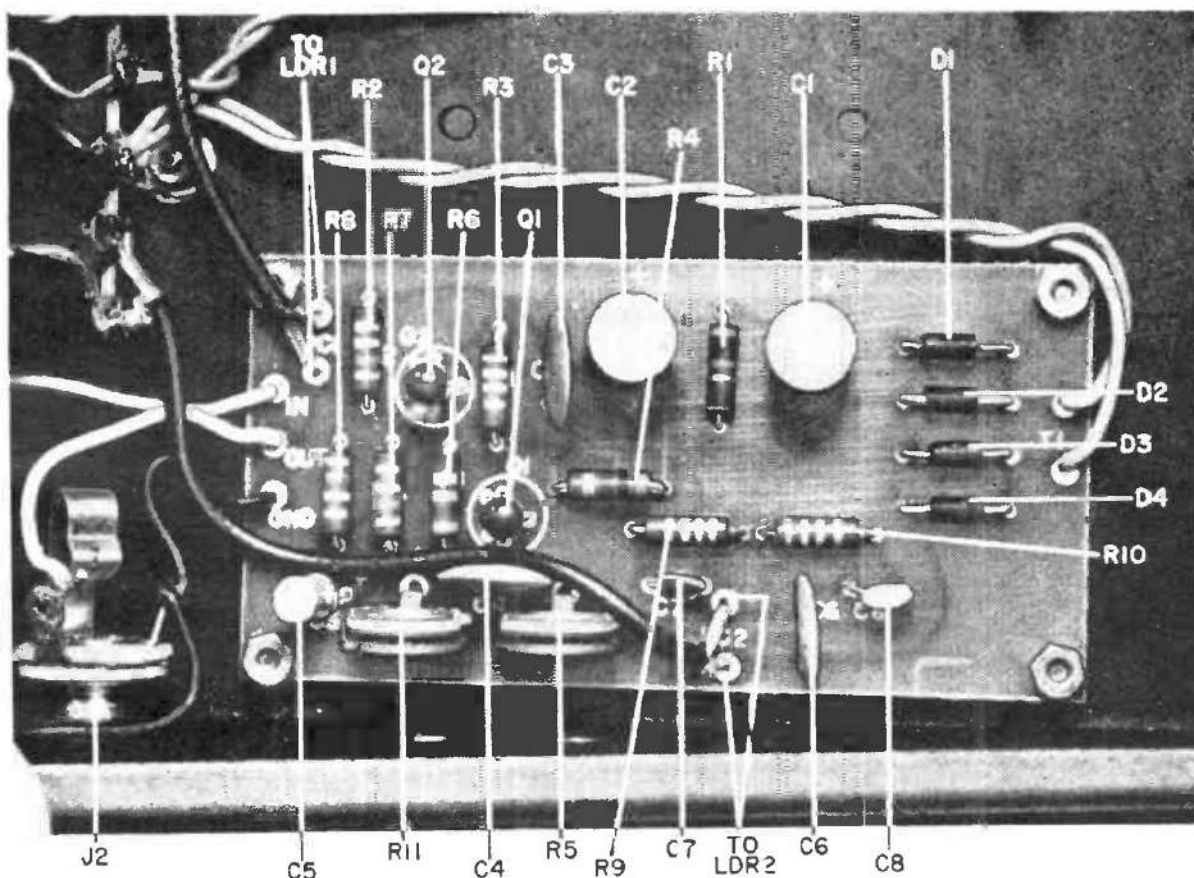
After installing all components on board, make sure both trimmer potentiometers are accessible through holes drilled in side of chassis. This view also shows connections to other elements.
